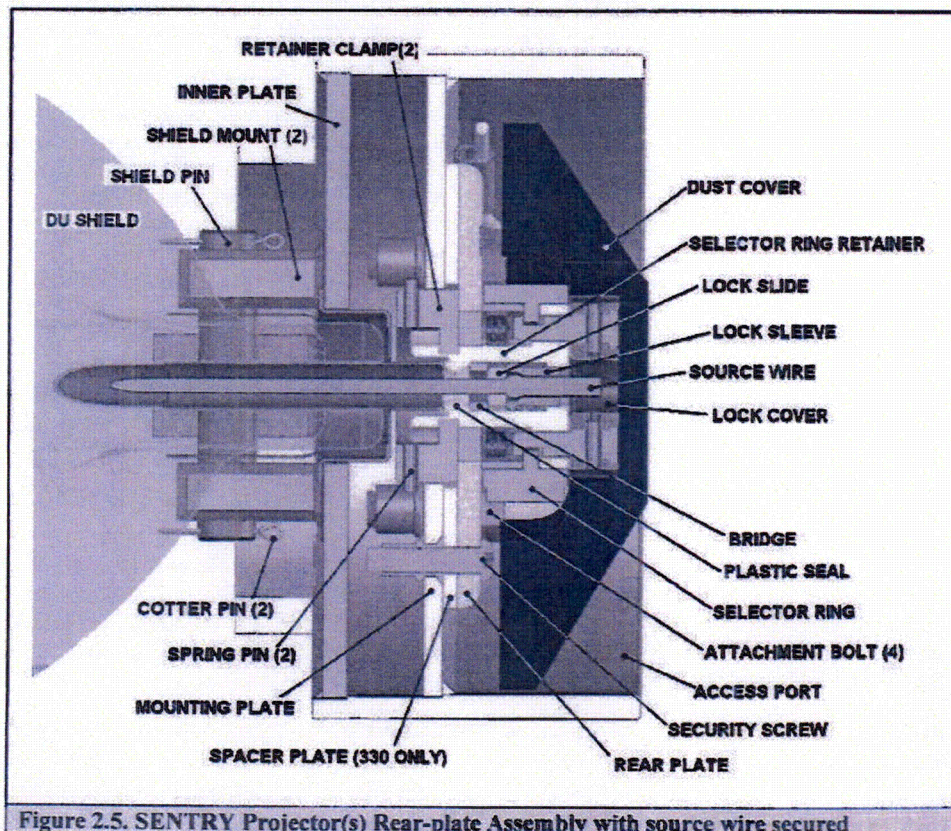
SENTRY Projector(s) Rear-plate Assembly with source wire secured
